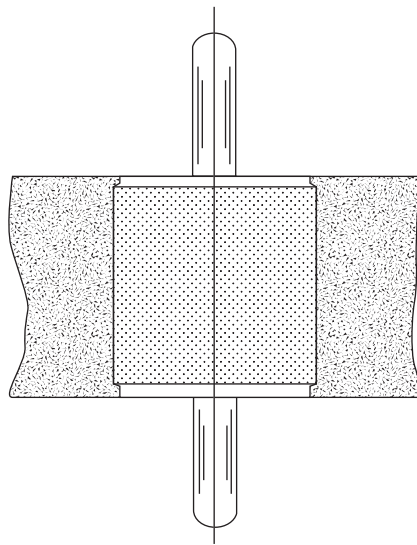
The portion of a moulded in insert that extends above the surface of the part should be round. Square holes are difficult and expensive to machine in the mould.
